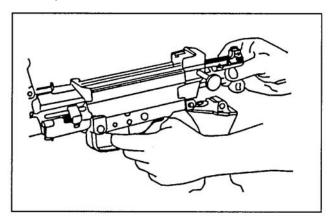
Replacement of the operating rod, slide assembly, and bolt assembly
